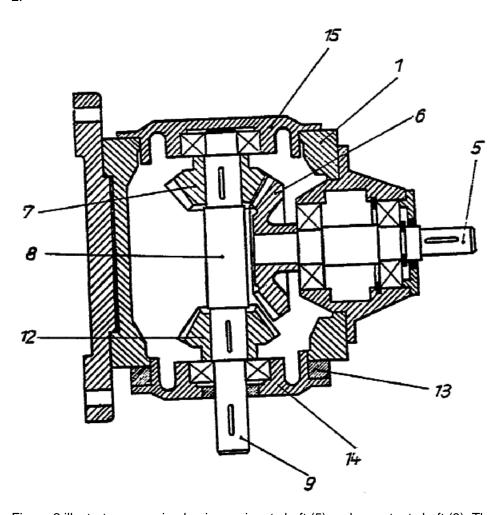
illustrates a gearing having an input shaft (5) and an output shaft (9). The gear ratio is varied from forward to reverse by converting the gearing as follows: the distance ring (13) is removed from its position between the casing body (1) and the lower lid (14) and is interposed between the casing body (1) and the upper lid (15). Thereby output shaft (9) is axially displaced so that input bevel gear (6) now meshes with lower output bevel gear (12) instead of upper output bevel gear (7) and the sense of rotation of the output shaft (8) being thereby reversed.
